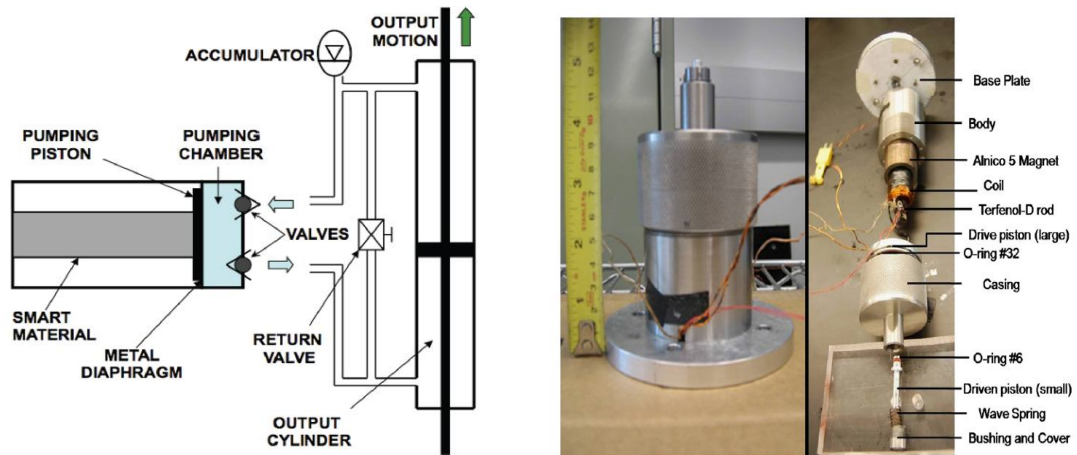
(a) Schematic of a hybrid actuator test setup (Source of figure: Chaudhuri et al., 2009) and (b) Assembled and exploded view of the hydraulically amplified magnetostrictive actuator (Source of figure: Chakrabarti and Dapino, 2012).
